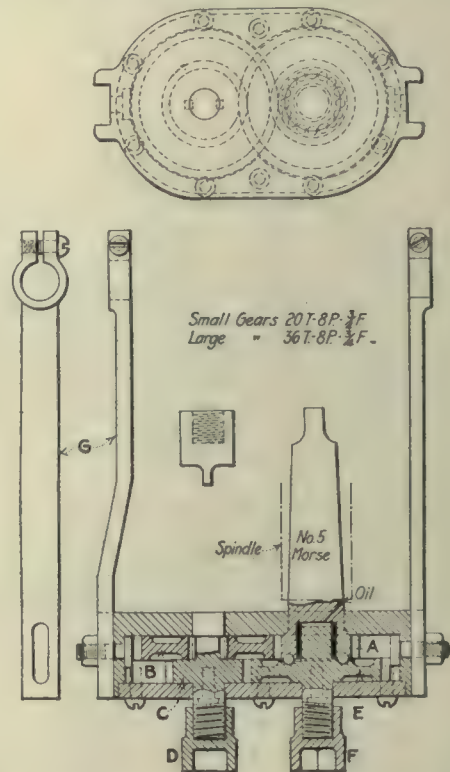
SECTIONAL VIEW OF REDUCTION GEAR
